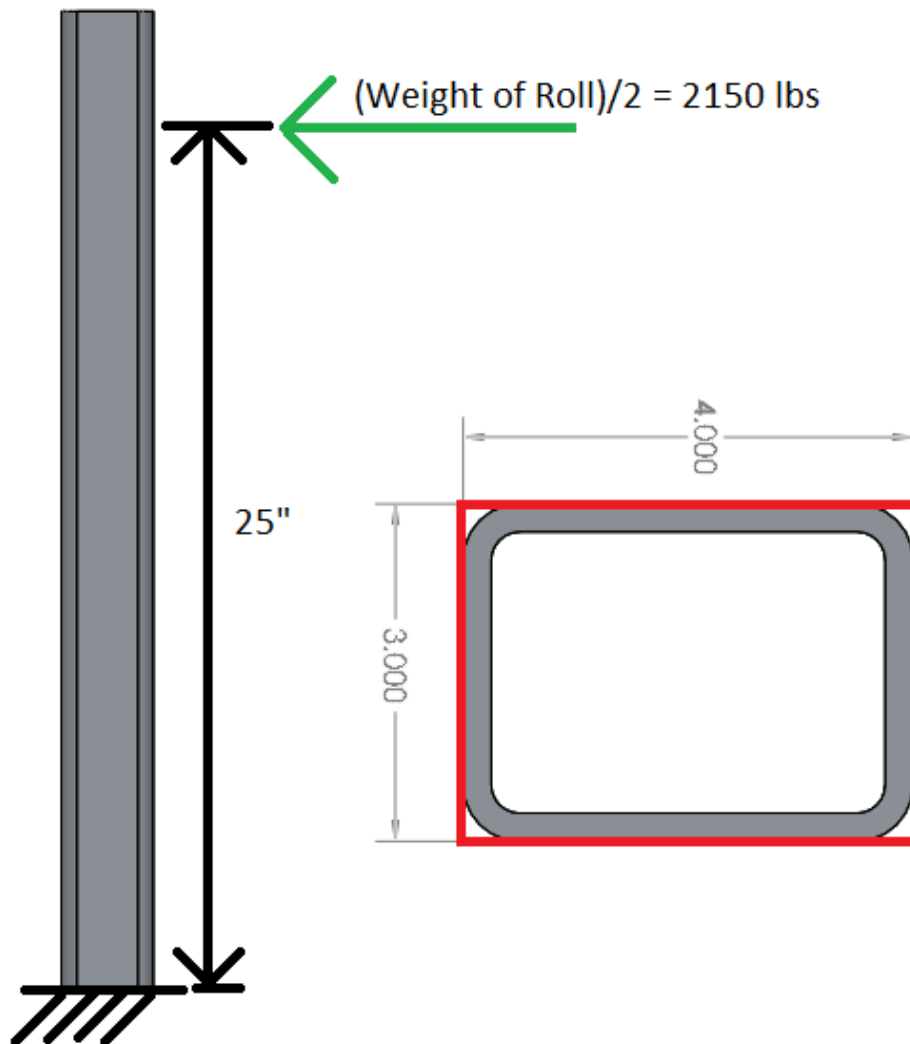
Welded Side Arm loading conditions and weld area [7].
